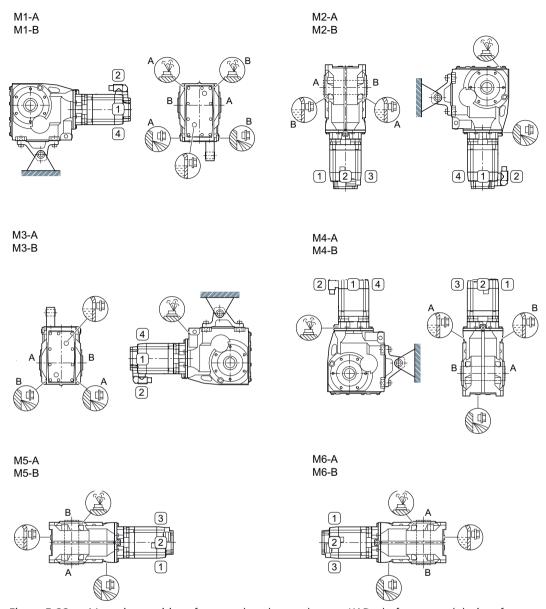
Mounting positions for servo bevel geared motor KAD, shaft-mounted design, frame sizes 39 - 149, 3-stage
